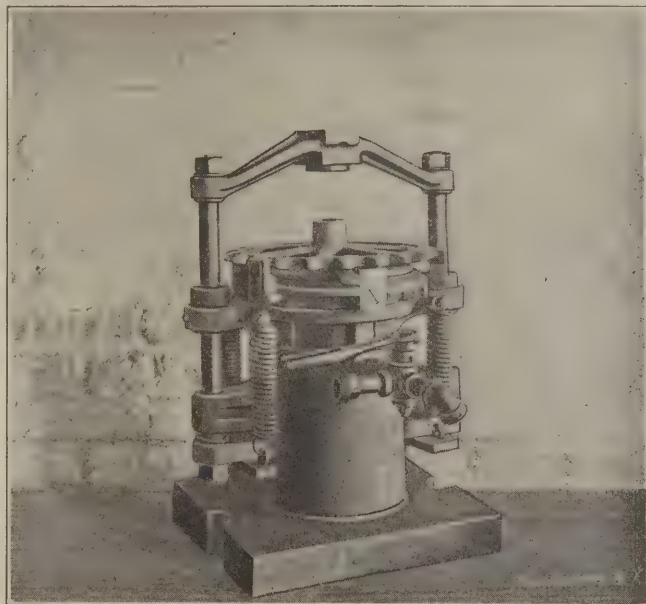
Pneumatic Clamping Jig for Sprocket Wheel.
